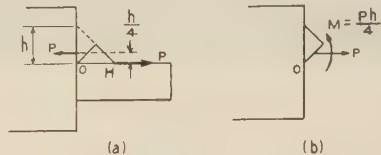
FORCES IN NONSYMMETRICAL TRANSVERSE FILLET WELD
